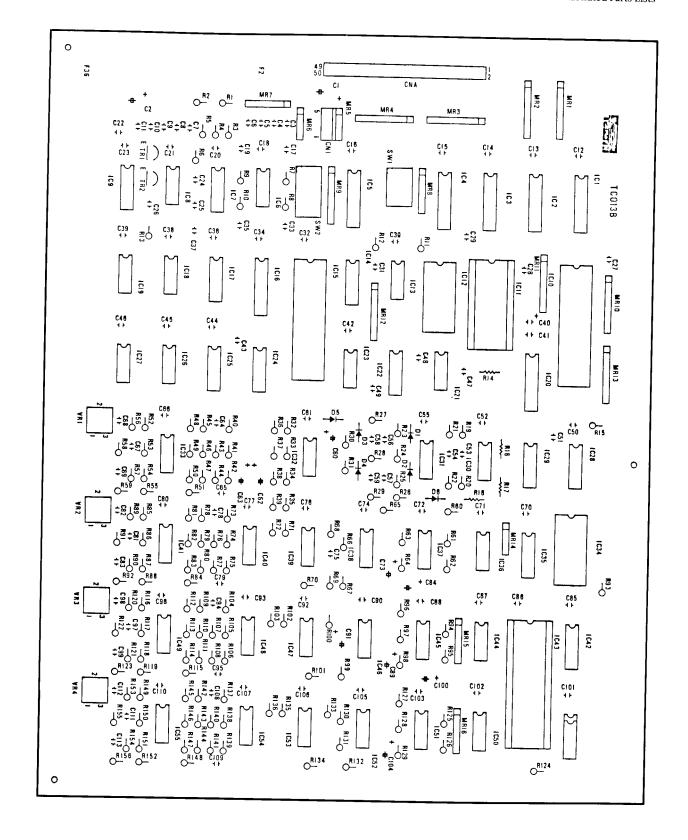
TX-1 Sound PCB Assembly A042020-21 A
